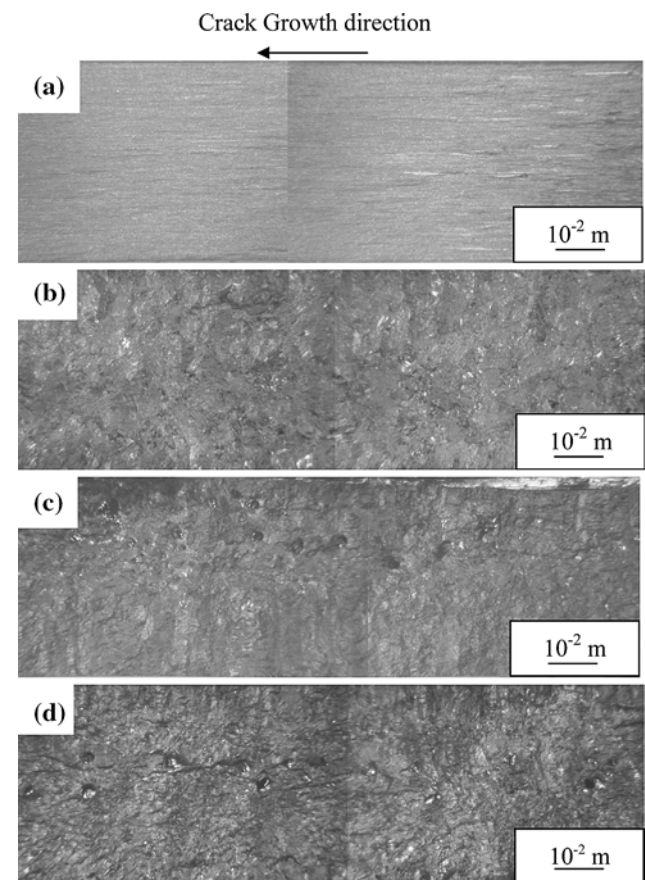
Typically macroscopic fatigue-fractured appearance of the (a) BM, (b) FW, (c) IW and (d) HW specimens aged at 593 °C
